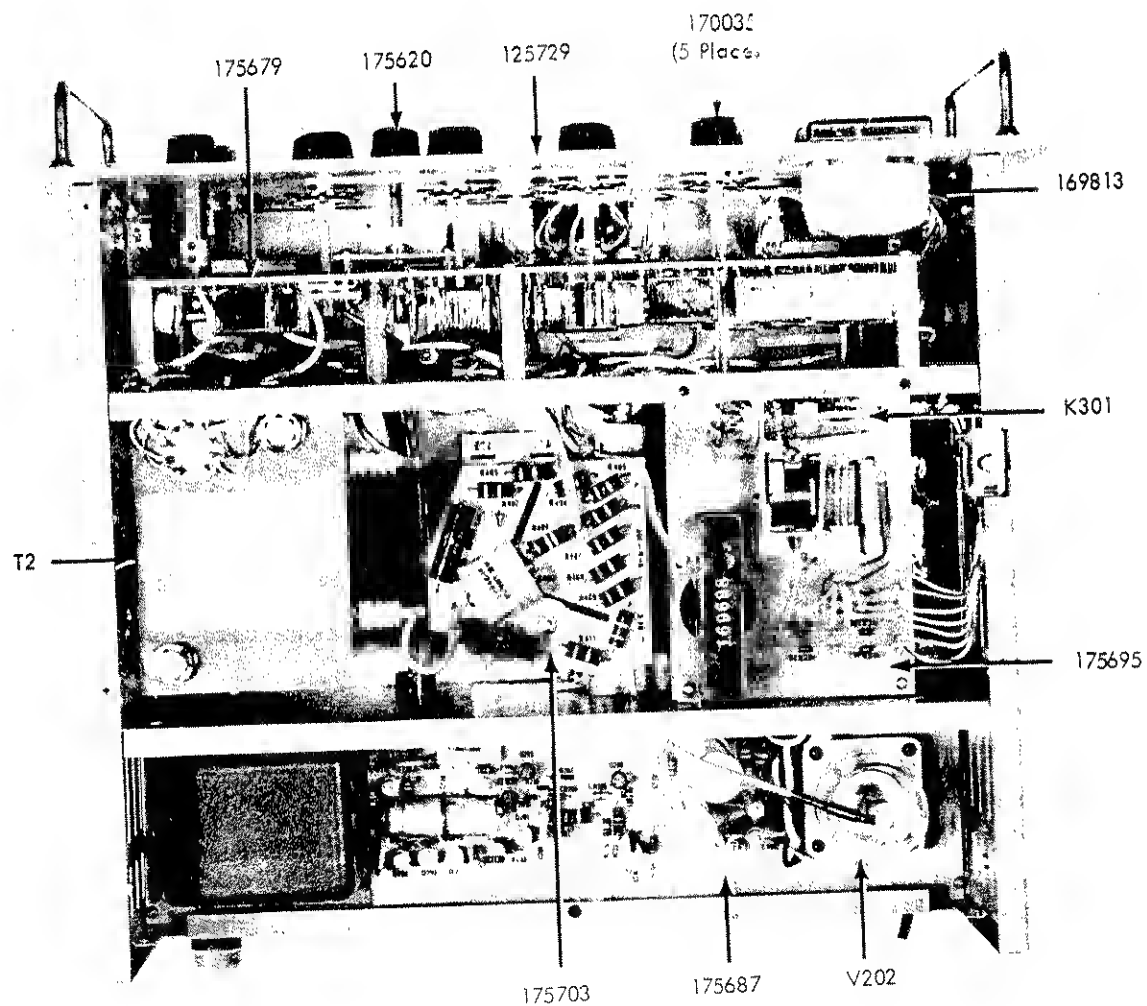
FINAL ASSEMBLY (Sheet 1 of 2)
